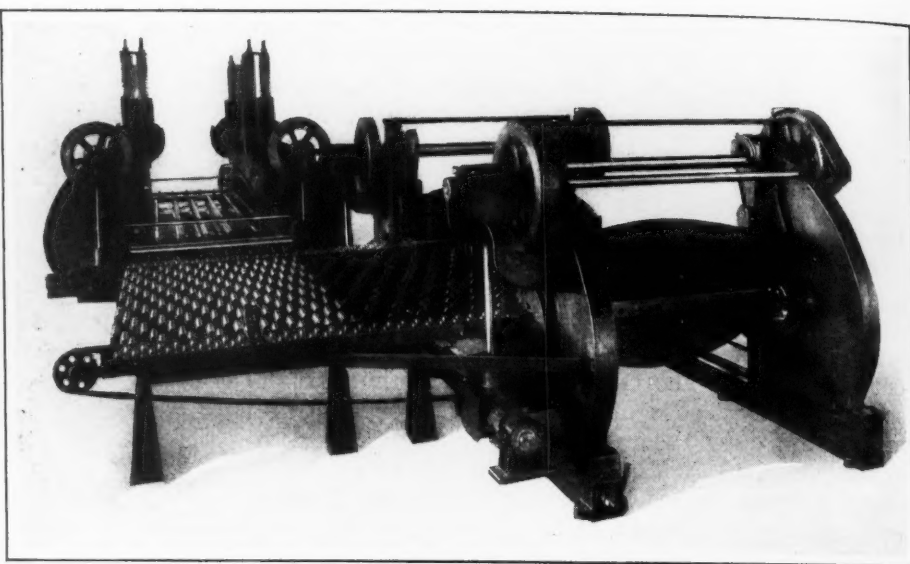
Shearing Machine for Use in Mills where Sheets are Rolled Singly or in Pairs
